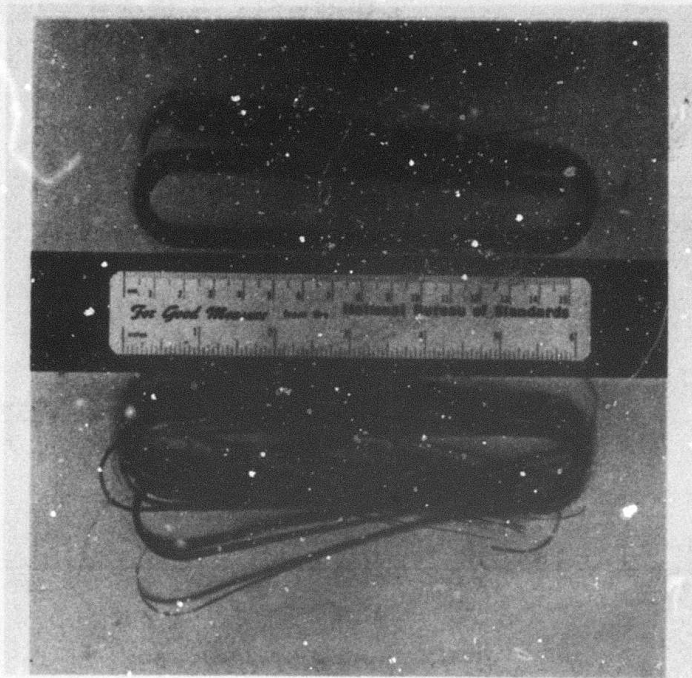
Tensile (lower) and fatigue (upper) failure of specimens tested at 4 K.
